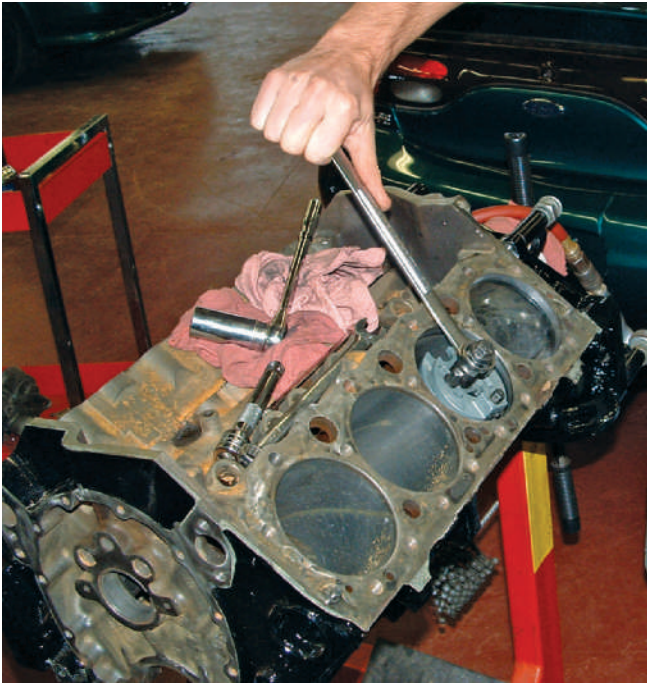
A ridge reamer should be used on all cylinders before removing the pistons.
